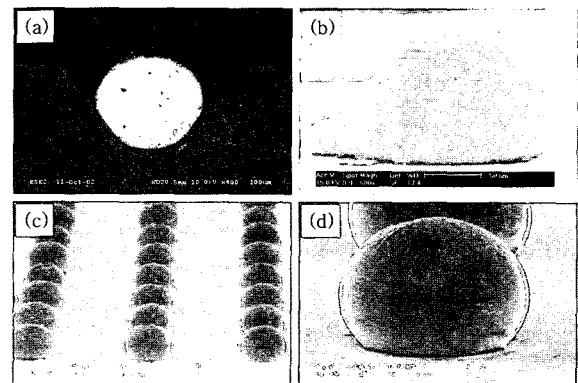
Procedure for solder bump transformation: (a)-(b) solder bumps formed in Si carrier, (c)-(d) transformed solder bumps on flip chip
